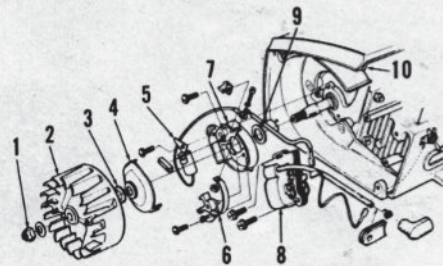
Exploded view of ignition assembly. Felt seal (3) is cemented to breaker box cover (4).
